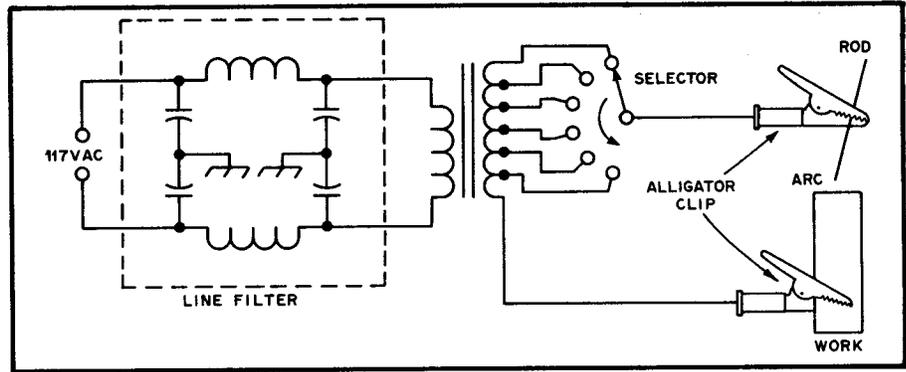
Arc welding setup with line filter (heavy-duty type) installed.
